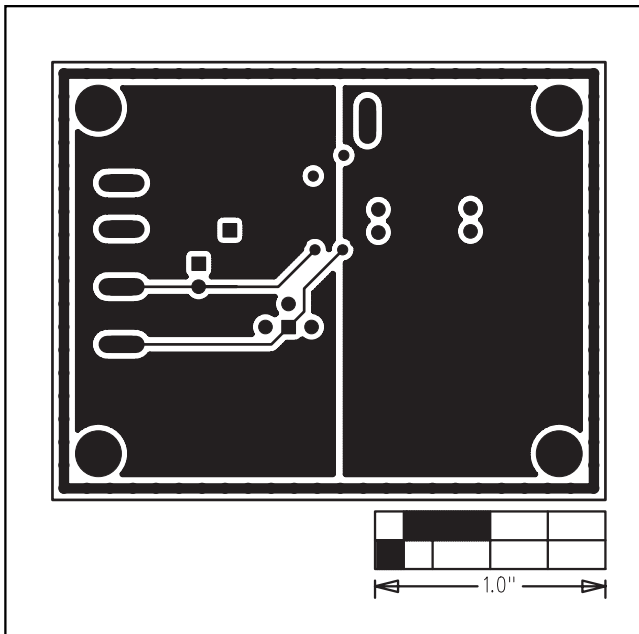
MAX9705B EV Kit PC Board Layout—GND Layer 2
